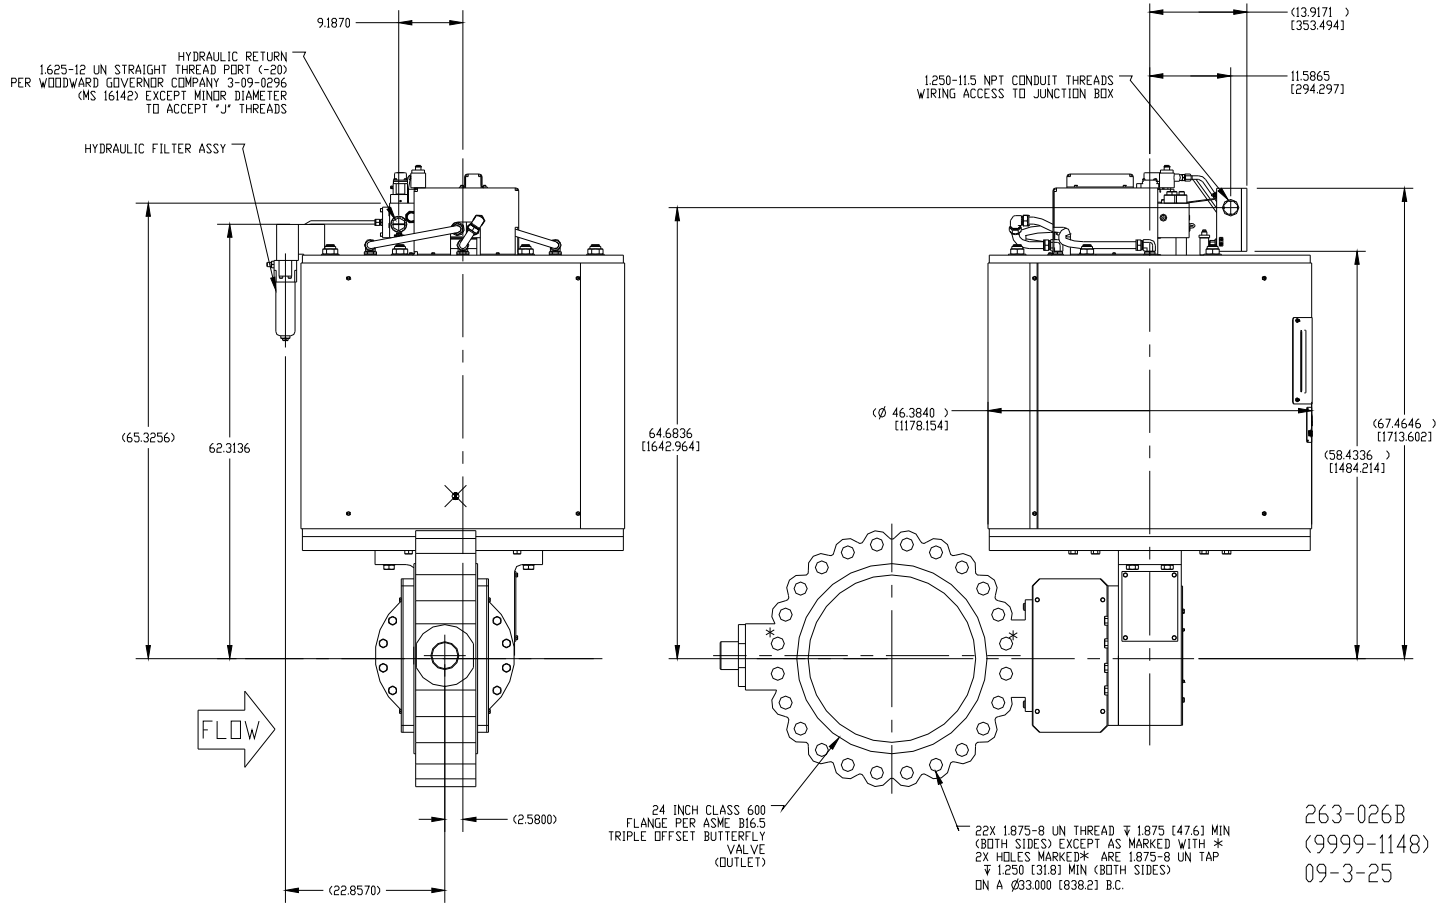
Outline Drawing, 24" valve (9904-948, -949)
